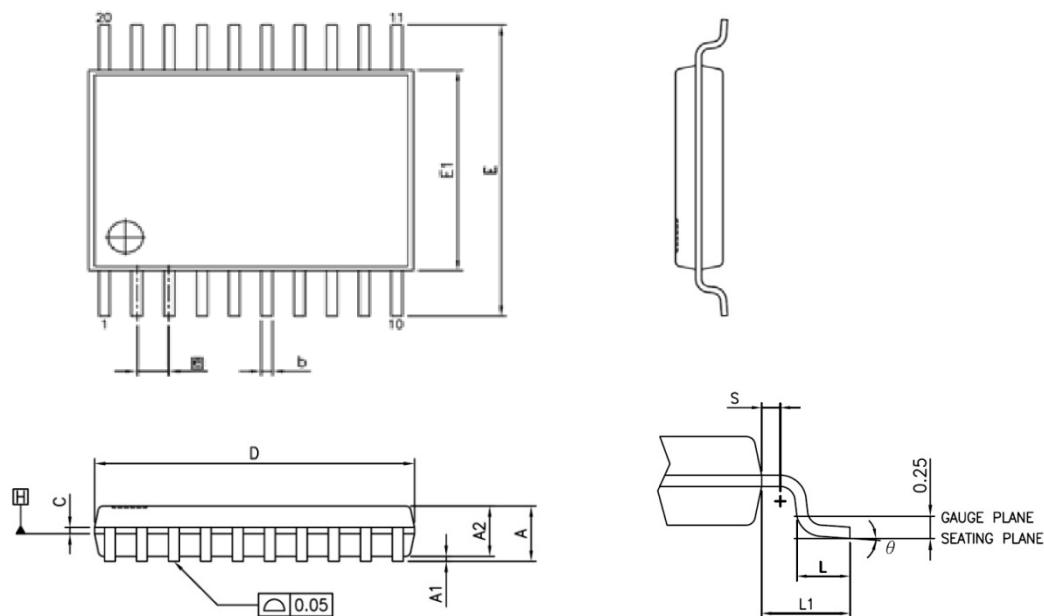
SSOP-20 (150 mil) Package Dimension
